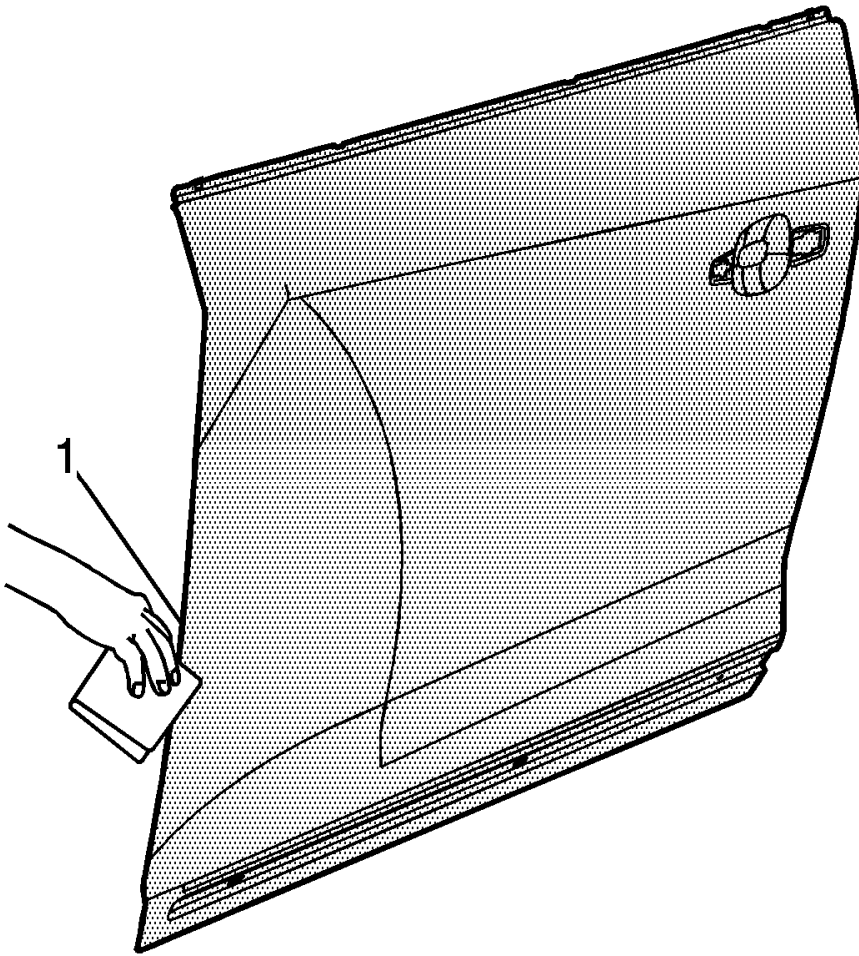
Scuffing Front Side Door Outer Panel Opposing Mating Surfaces
